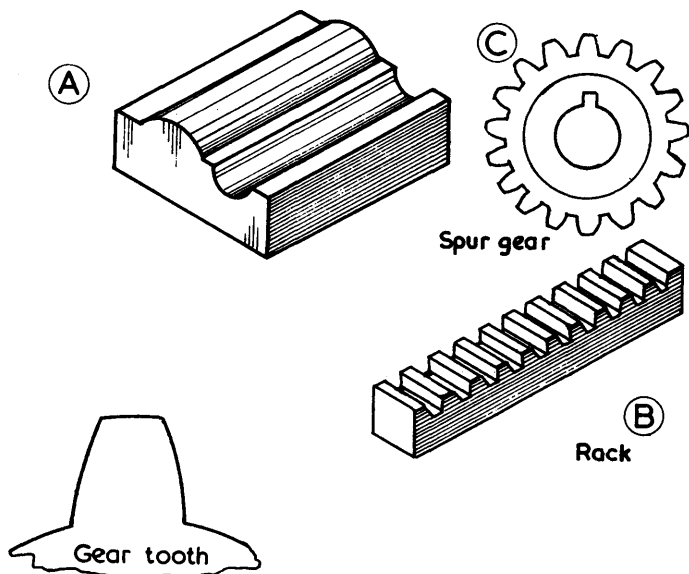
Applications of Form-relieved Milling Cutters.
